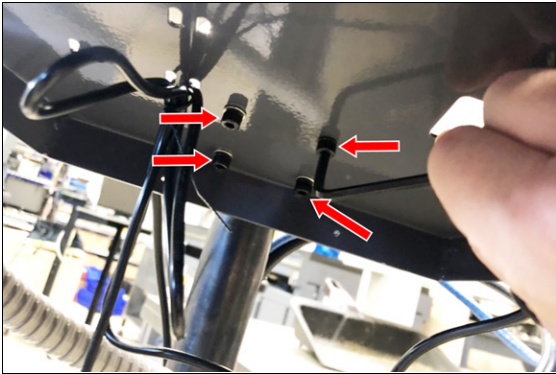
Attaching the keyboard tray to the lower controller arm mount (from below).
